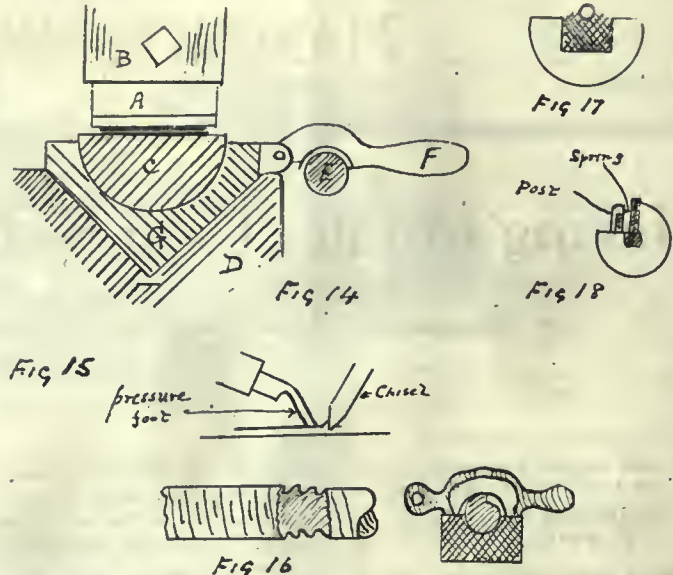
DETAILS OF PARTS. FIG. 15—HOLDING DOWN THE BLANK. FIG. 16—SCREW AND METHOD OF BABBITTING. FIG. 17—ROUND FILE ON BED. FIG. 18—HOLDING TO CUT EDGES.
